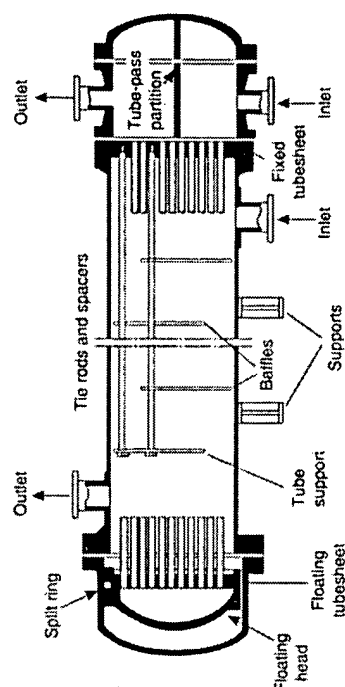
Heat exchanger with floating head (two tube-pass, one shell-pass)
